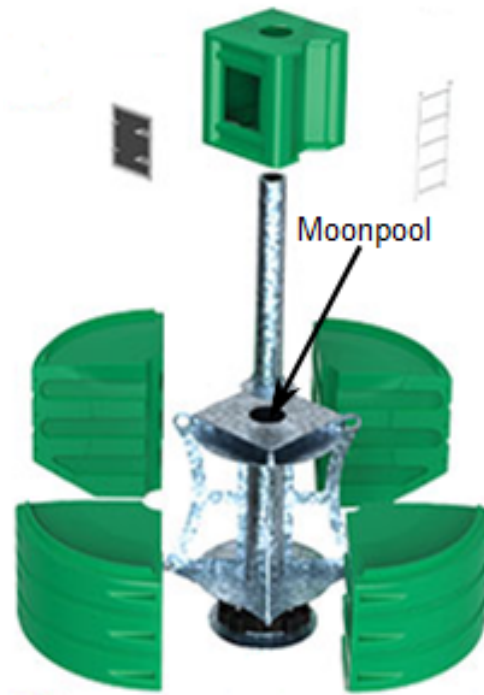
Exploded schematic of the Seagull buoy, courtesy of JFC Ltd.
